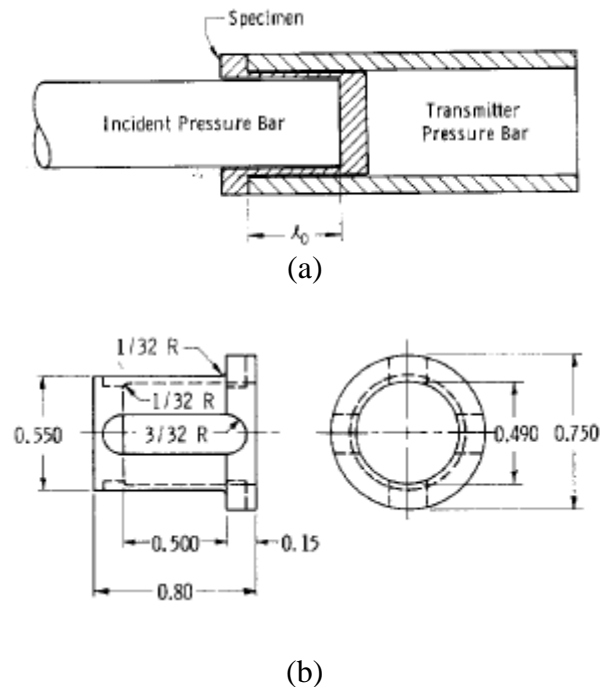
Tensile test set-up using tubular transmitter bar and hat-shaped specimen (a) Specimen installation, and (b) Test specimen [4]
